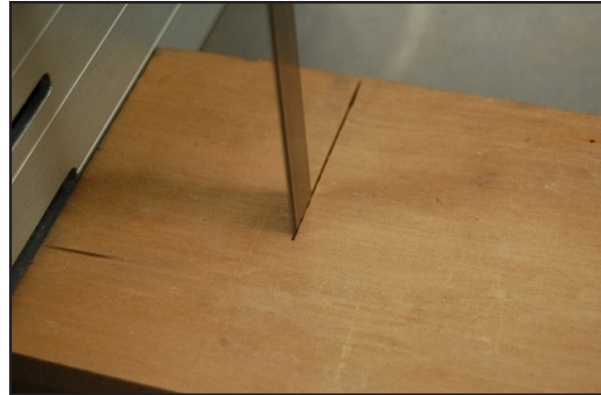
provides an example of a crosscutting operation, illustrating how the bandsaw is used for this purpose.
